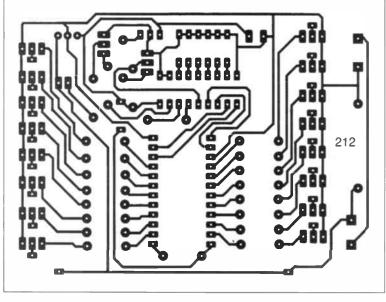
Receiver/Decoder printed circuit board component layout, wiring and full size underside copper foil master pattern.
